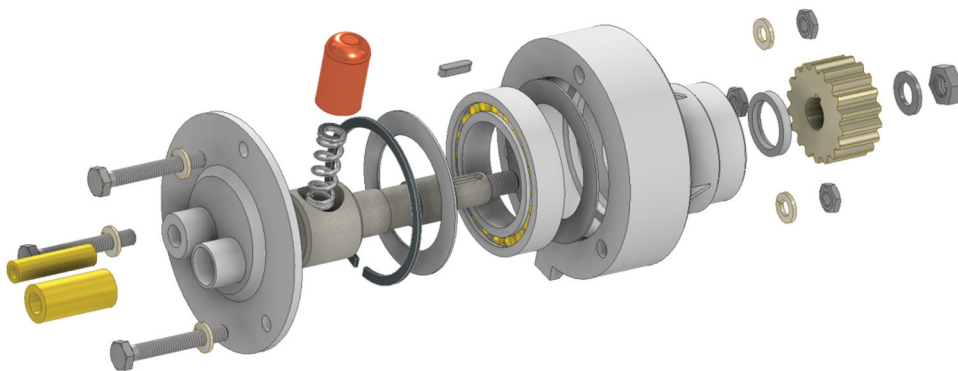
Exploded view of the rotary cylinder pump on Inventor.
